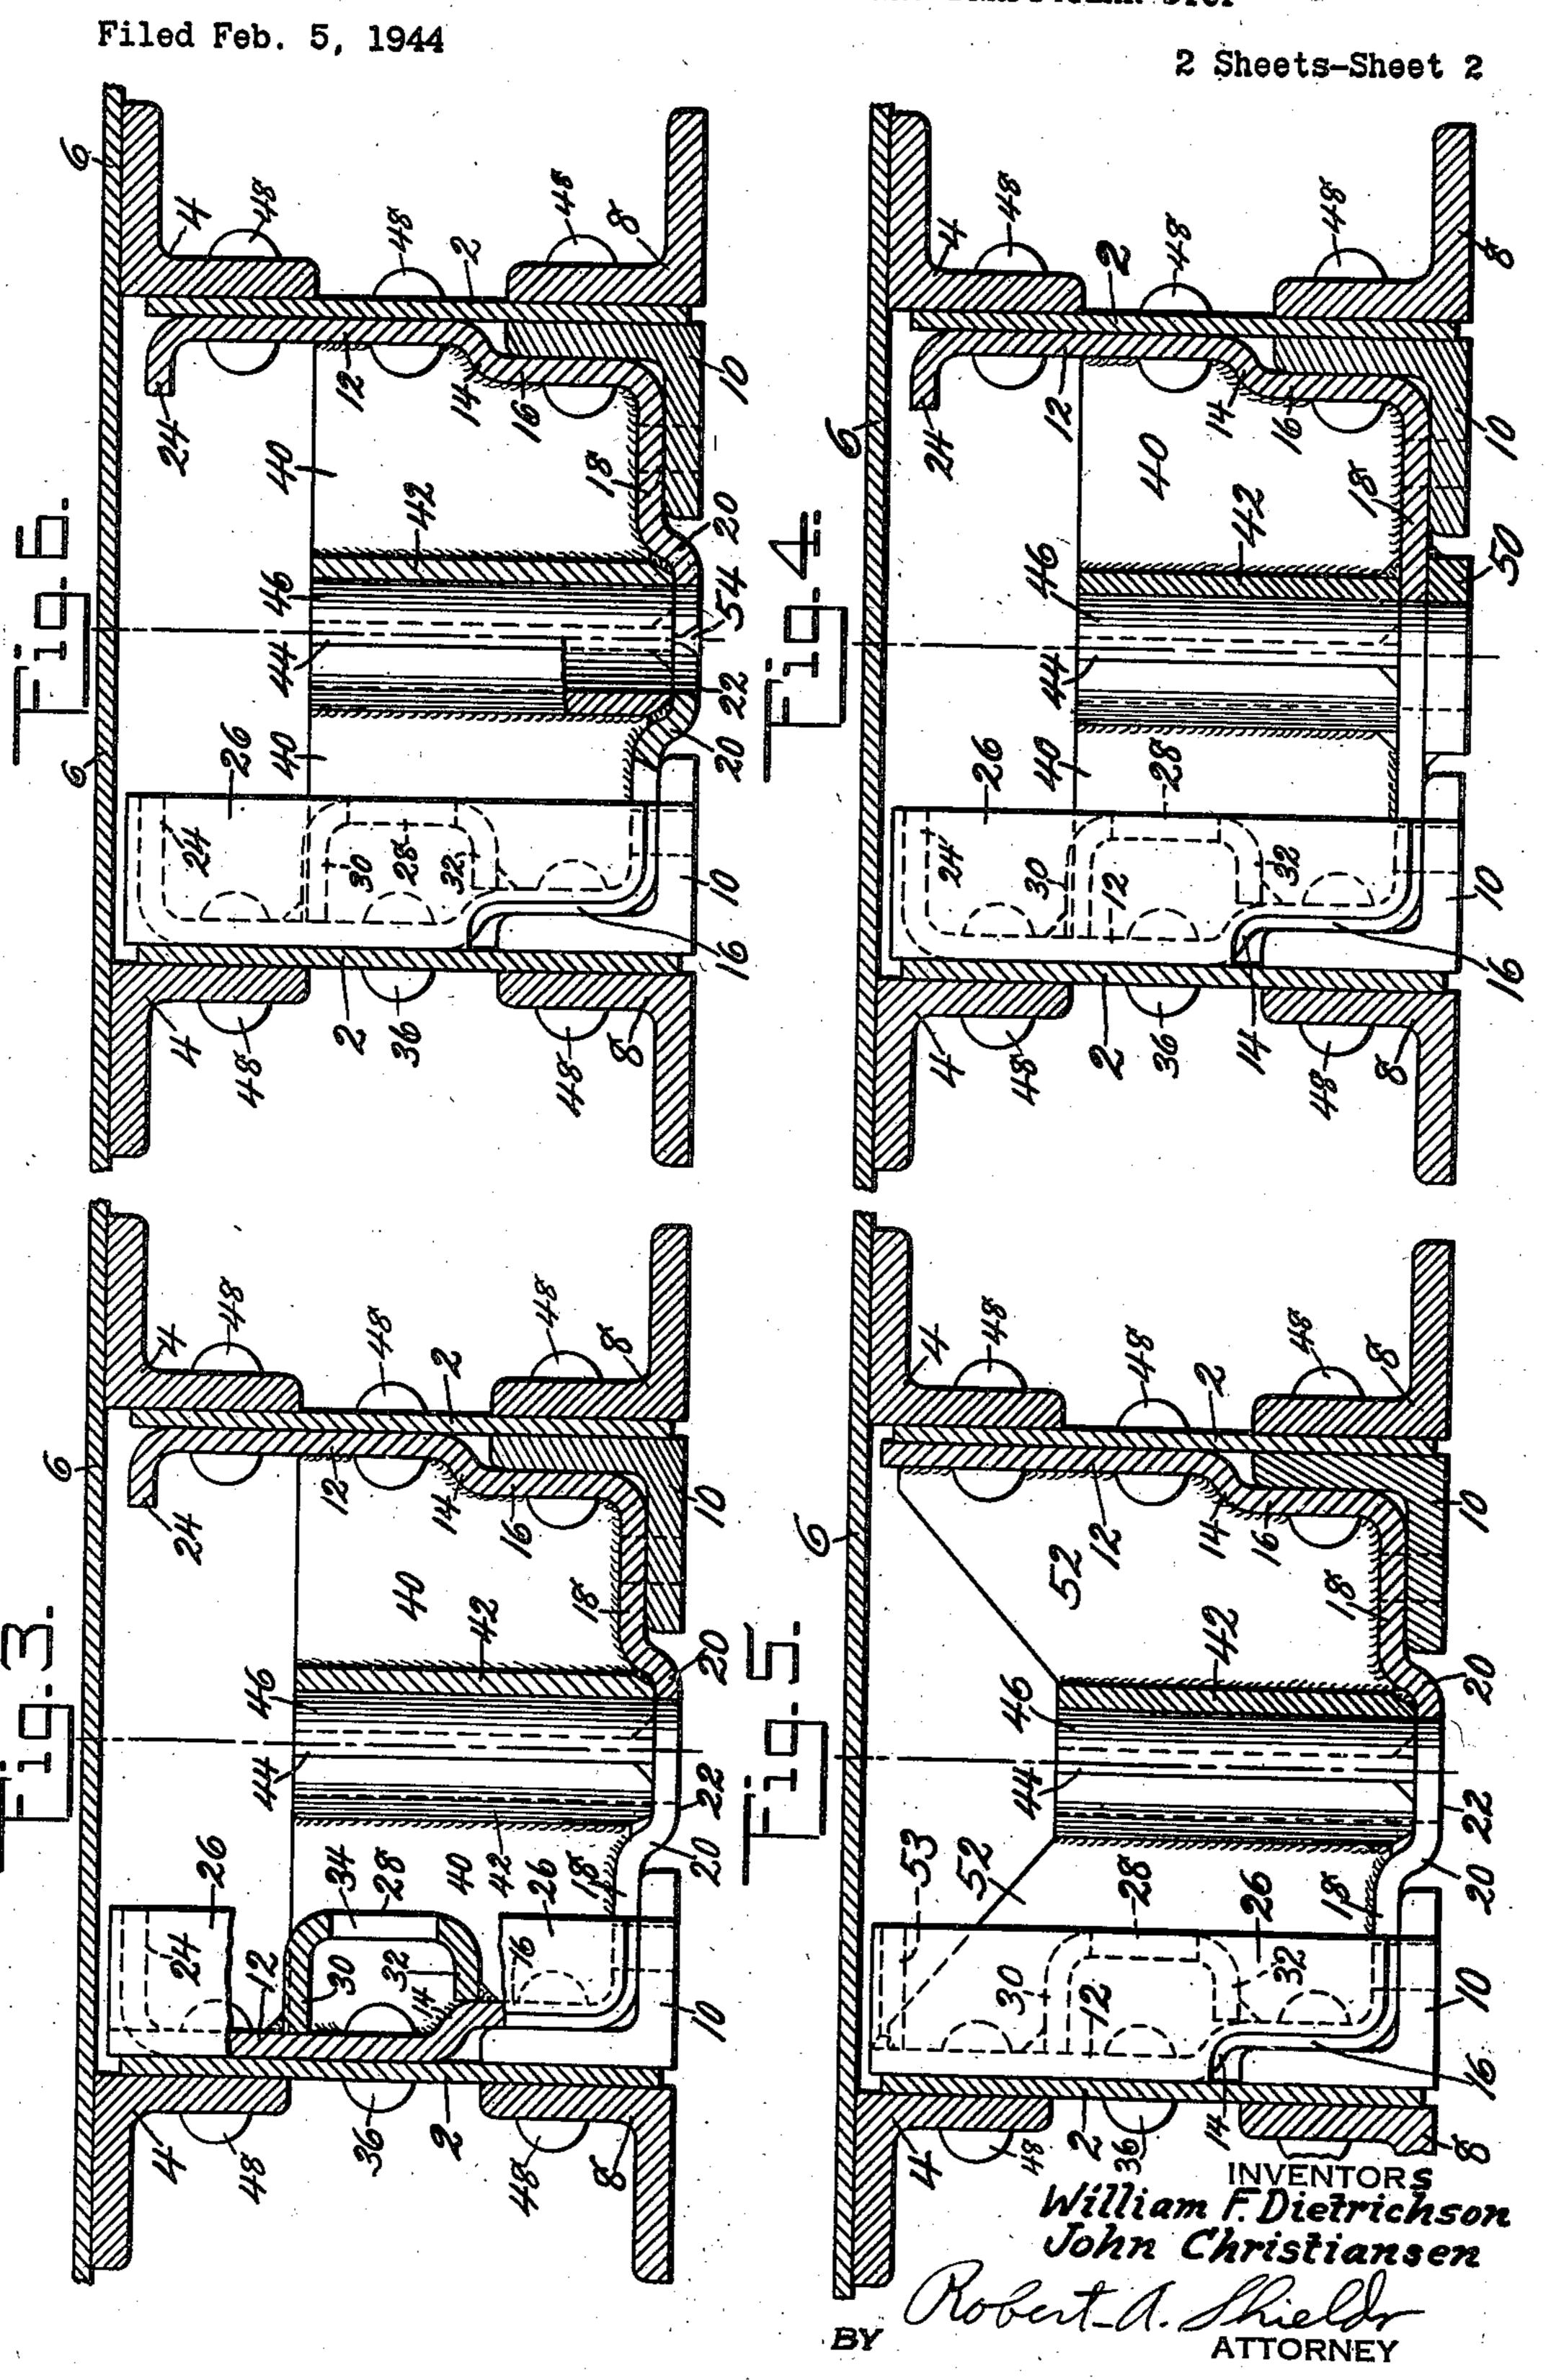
PLATE METAL SILL BRACE AND DRAFT GEAR STOP
